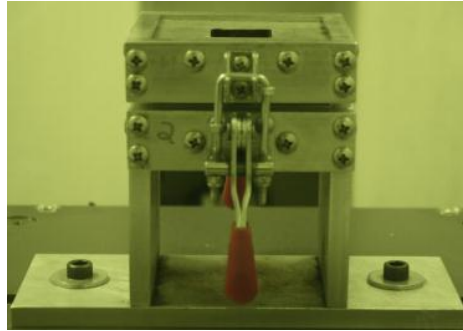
Clamp for laser welding (Courtesy: Design by Mark McGuire; Design modification by Sam Brannon and Steve Etringer)
